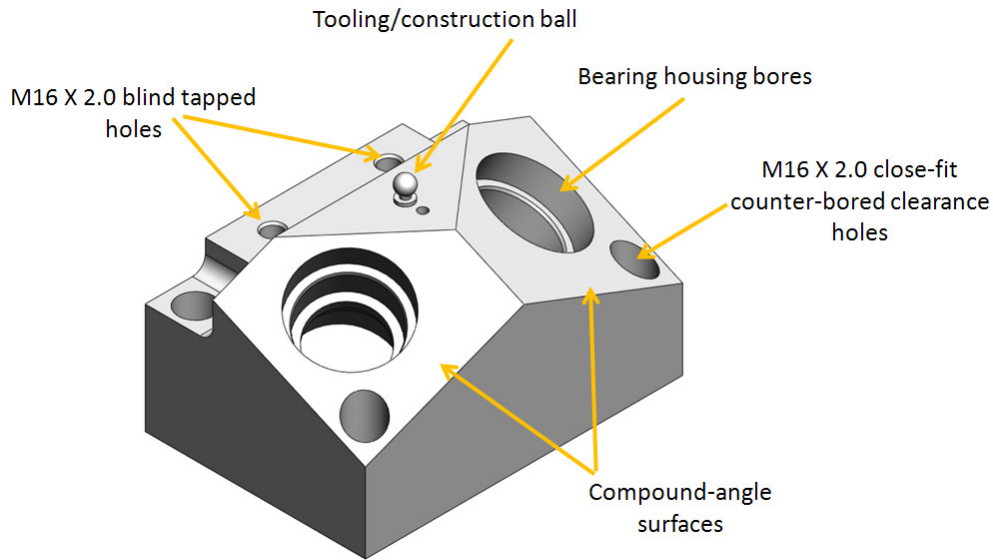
The 10223-DT-015 is shown. The design features compound angle-surfaces into which the bores that accommodate the strut-ends are machined (and similar geometries on the underside, not-shown), 4 duplicate clearance holes for mounting fasteners, blind tapped holes for mounting work platforms and electronics boxes, a tooling ball to aid in manual construction should the vendor decide to machine this part manually, and a tapped hole for lifting provisions [30].
